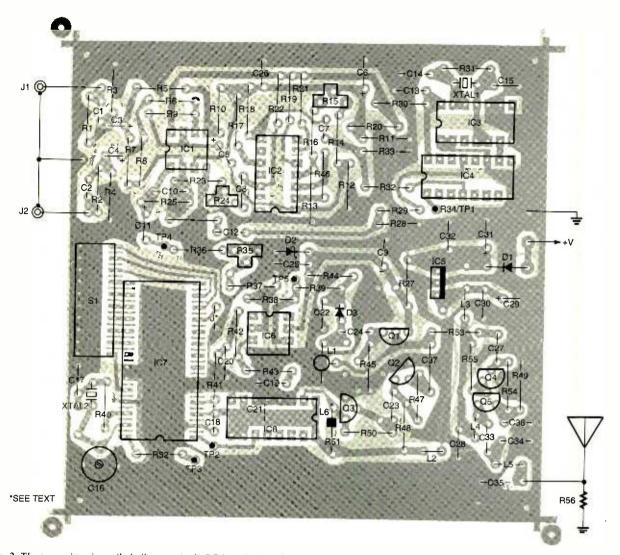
The transmitter is easily built on a single PC board. A single surface-mount capacitor is soldered to the bottom side of the board. Be sure to solder the component leads on both sides of the board where pads are provided on the component side.
